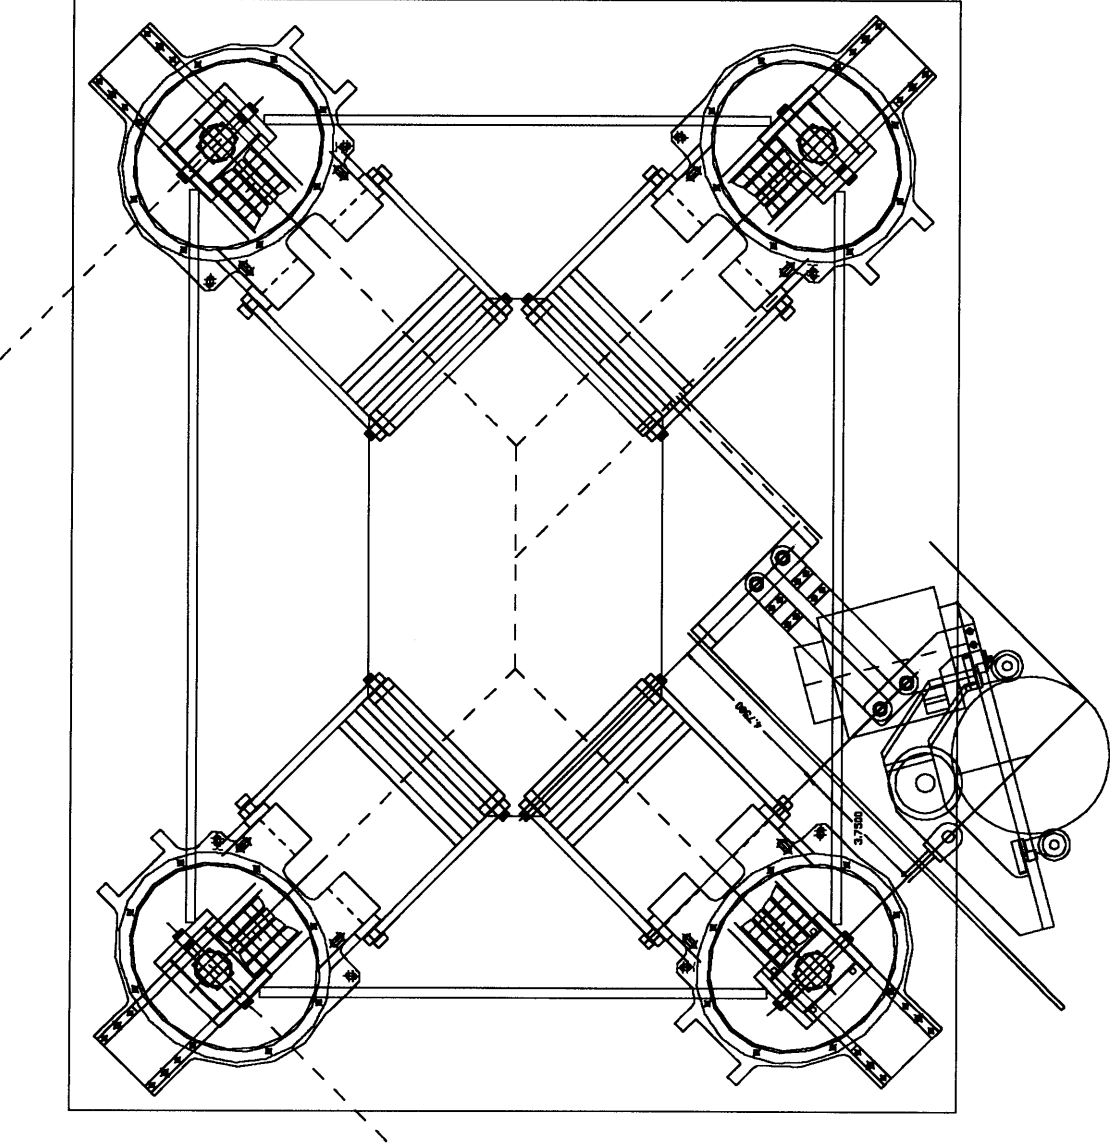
Four Wheeled Vehicle Assembly Drawing
